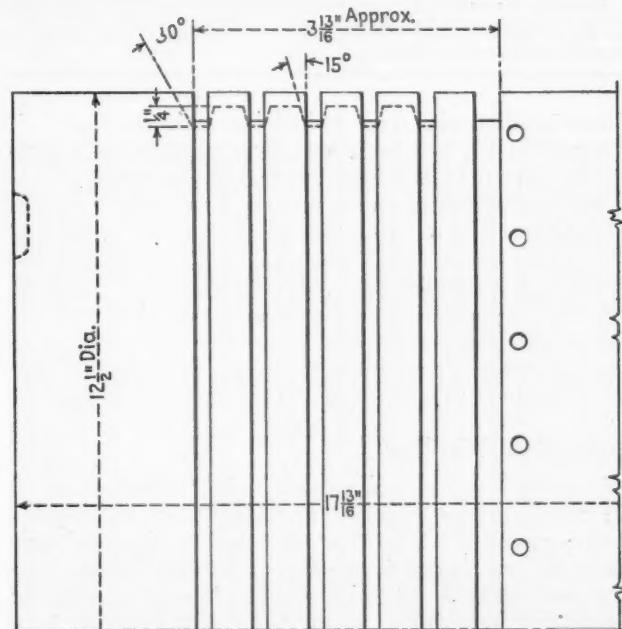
Diagram showing extent of machining of worn ring-grooves of aluminum piston, 12 1/2-in. diameter by 17 13/16 in., in preparation for reclamation by inert-gas-shielded-arc-welding
